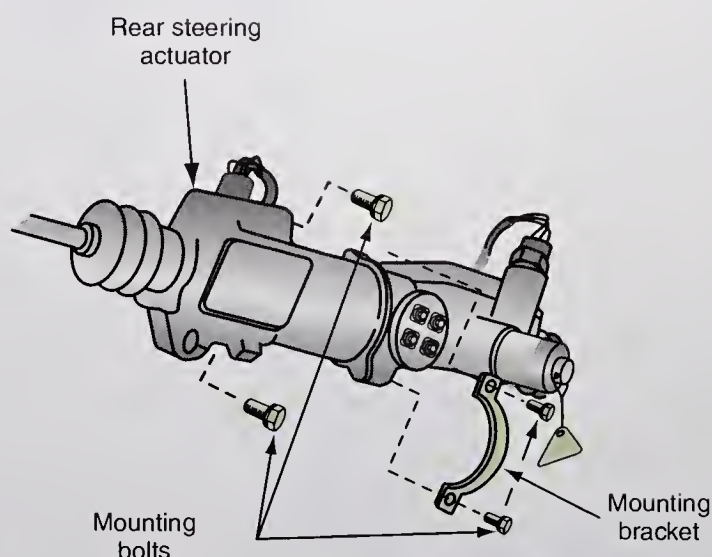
Removing the four mounting bolts, bracket, and rear steering actuator.
